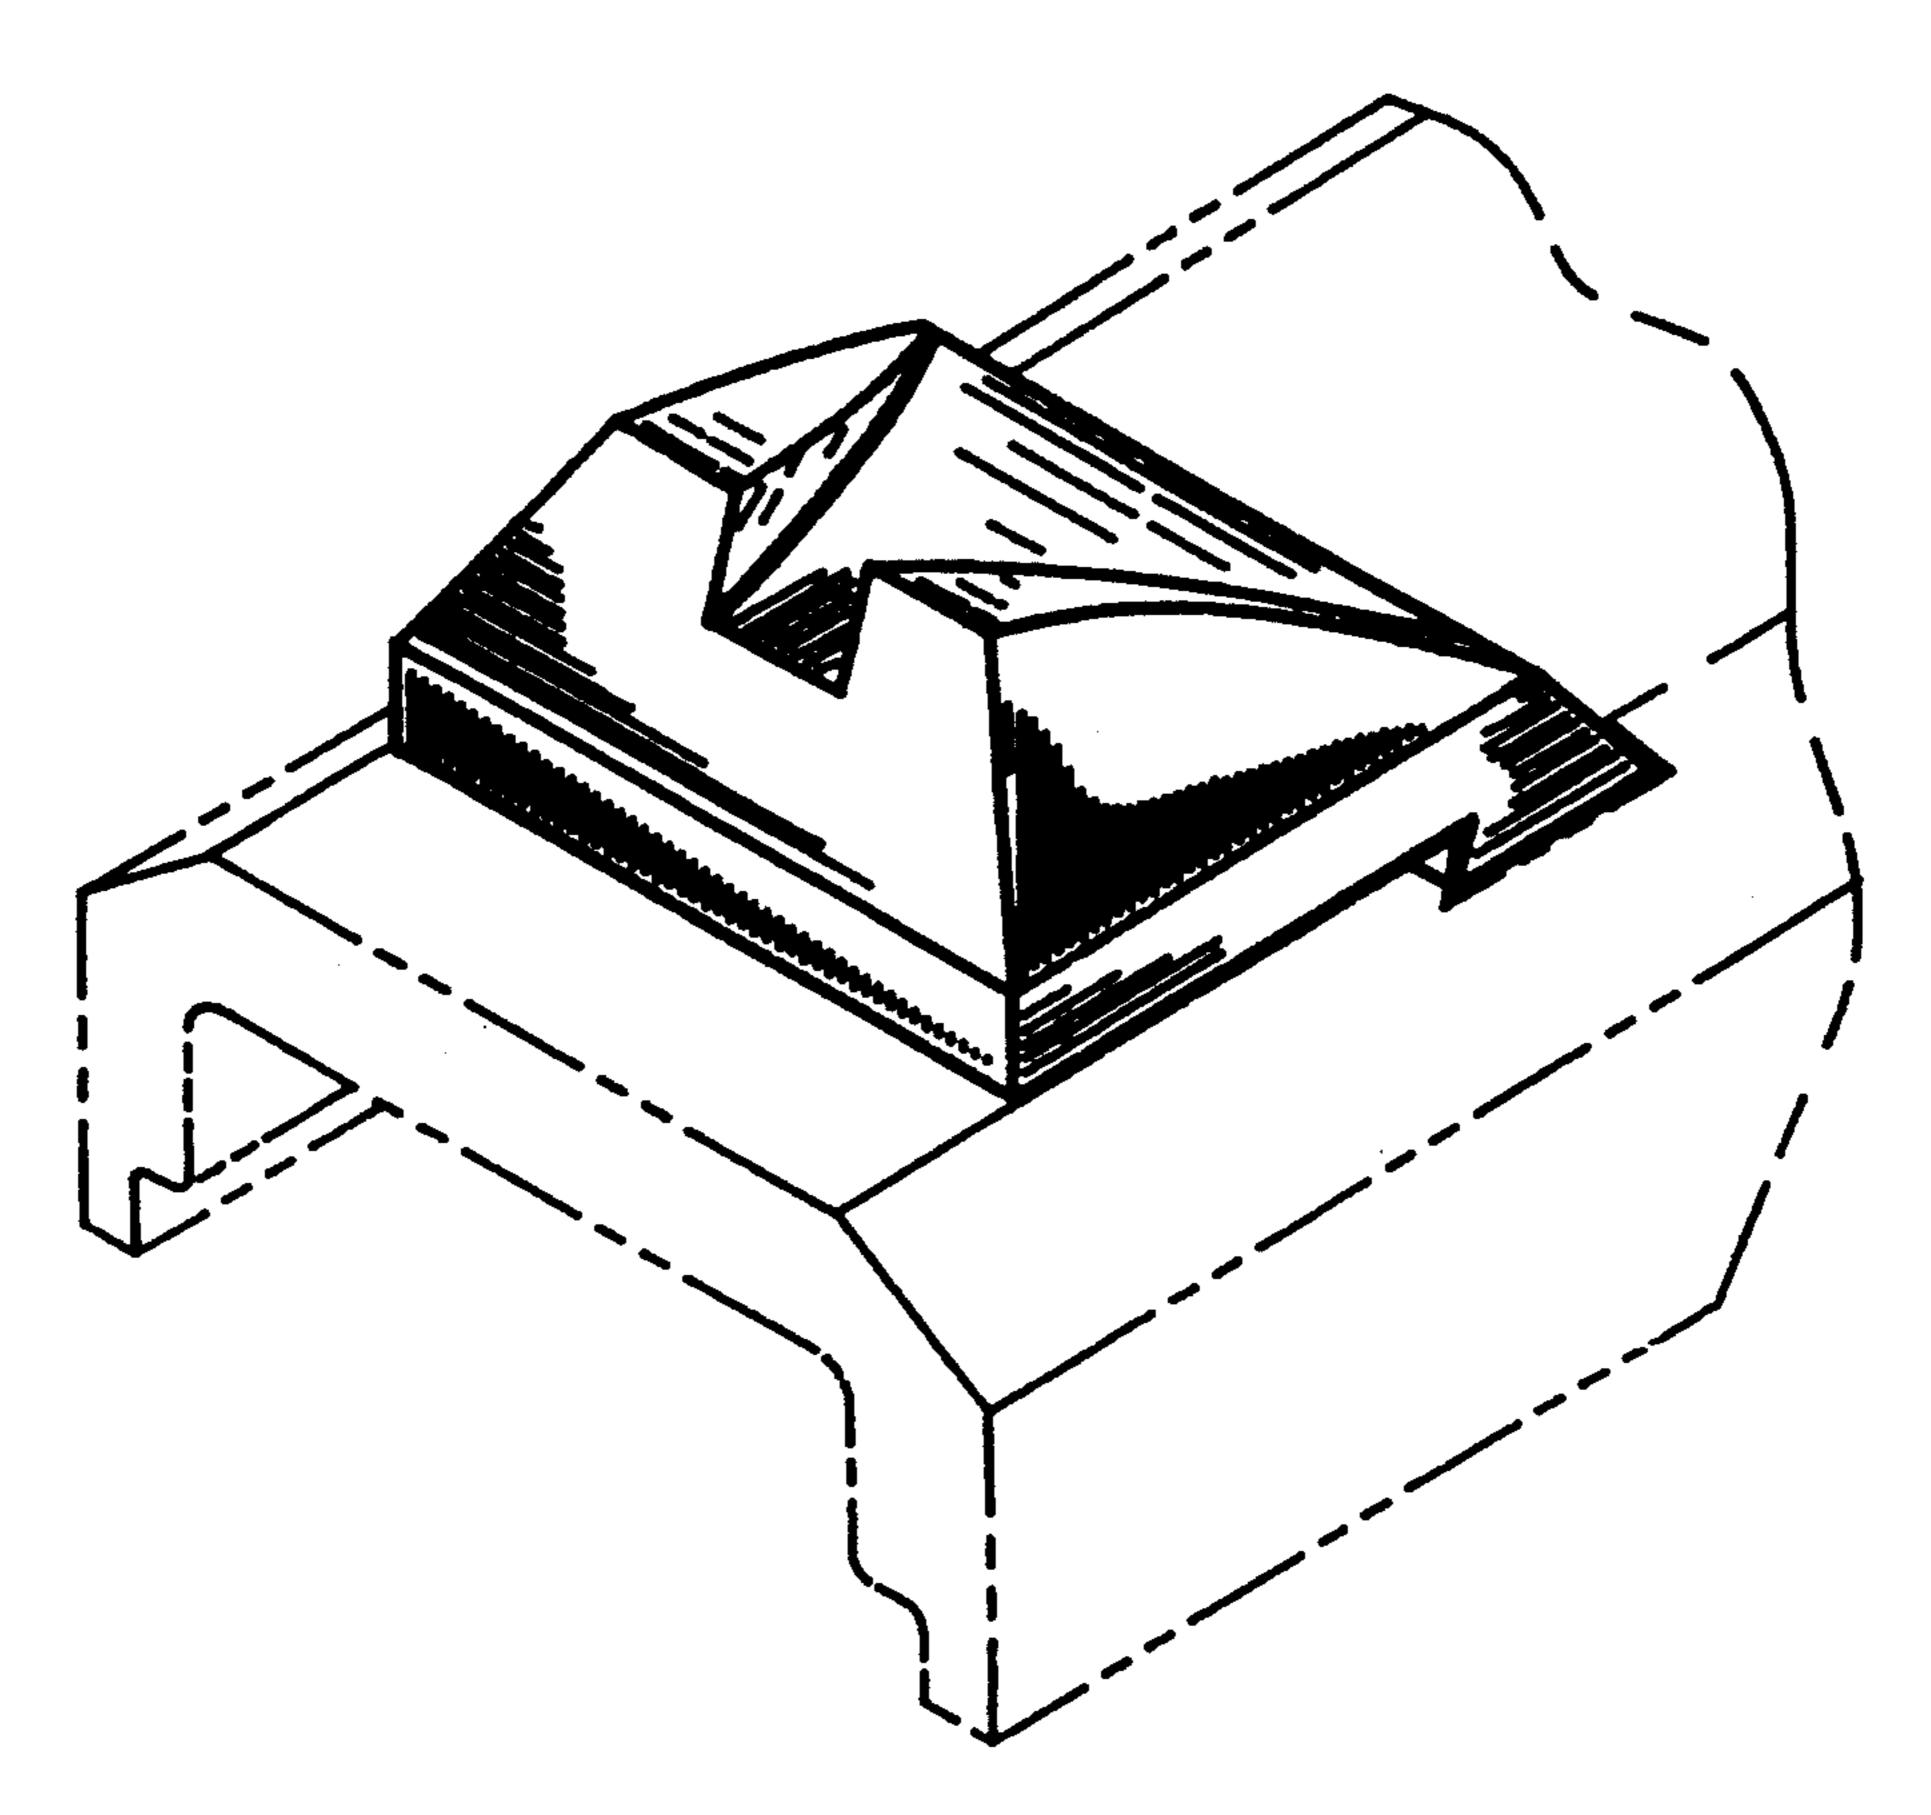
is a perspective view of the alternate embodiment of the rear sight for a handgun of this invention; FIG. 8 is a top plan view of the alternate embodiment of the rear sight for a handgun;
